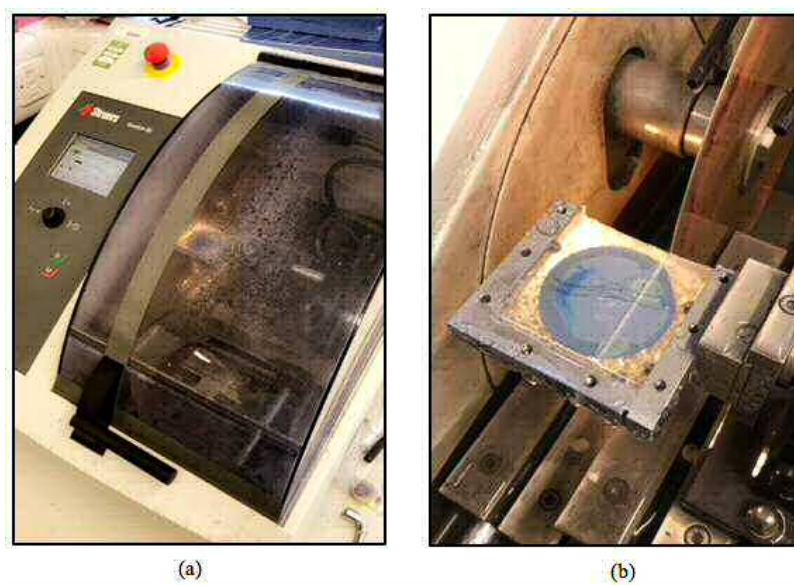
(a) Stuers Secotom-50 cut-off machine, and (b) the wheel starting to cut the wafer, to be ready to measure the thicknesses later.
